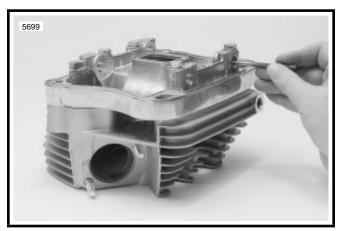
Measuring Rocker Arm Shaft Bore Diameter in Lower Rocker Cover
